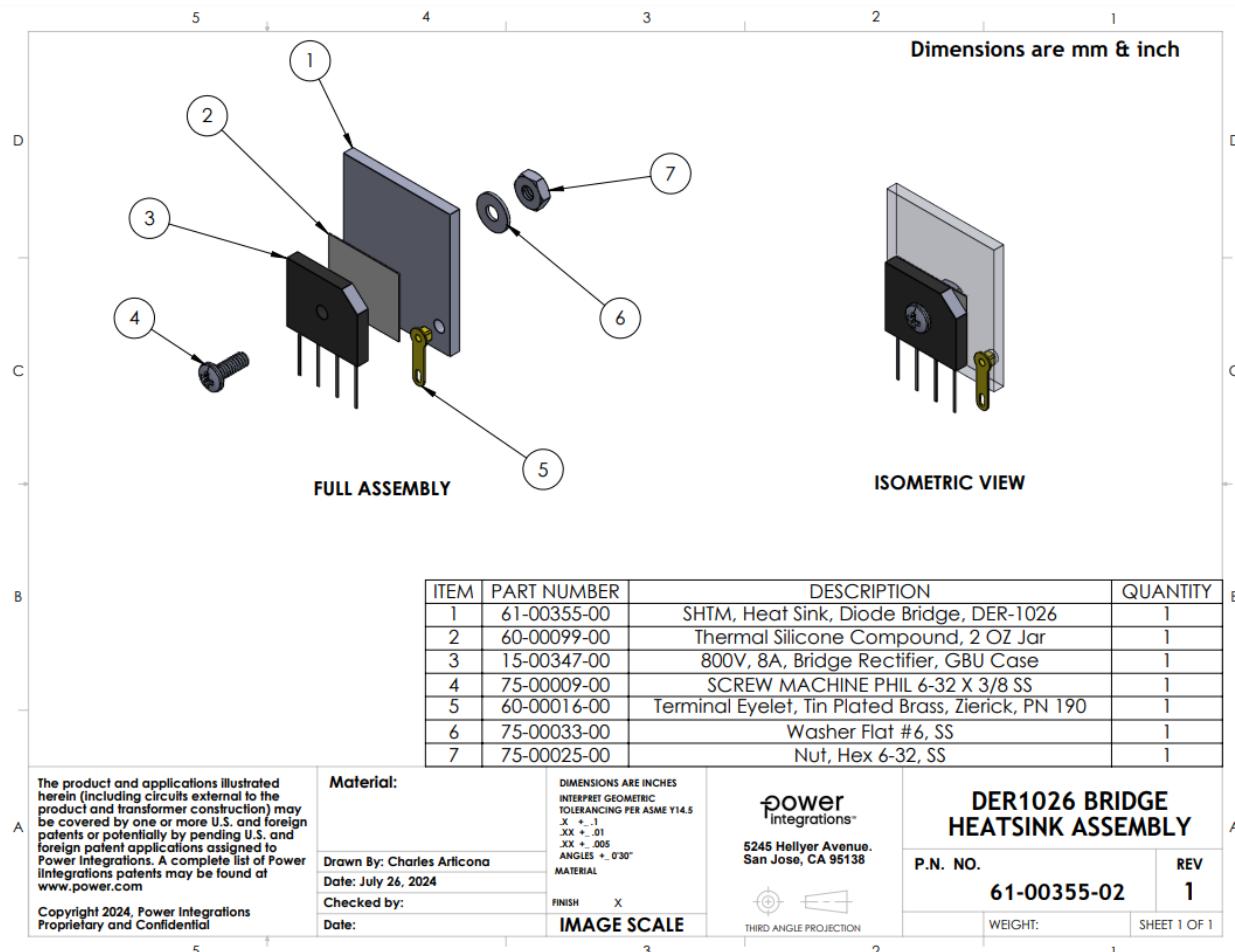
DER-1026 Bridge Rectifier Heat Sink Assembly.
